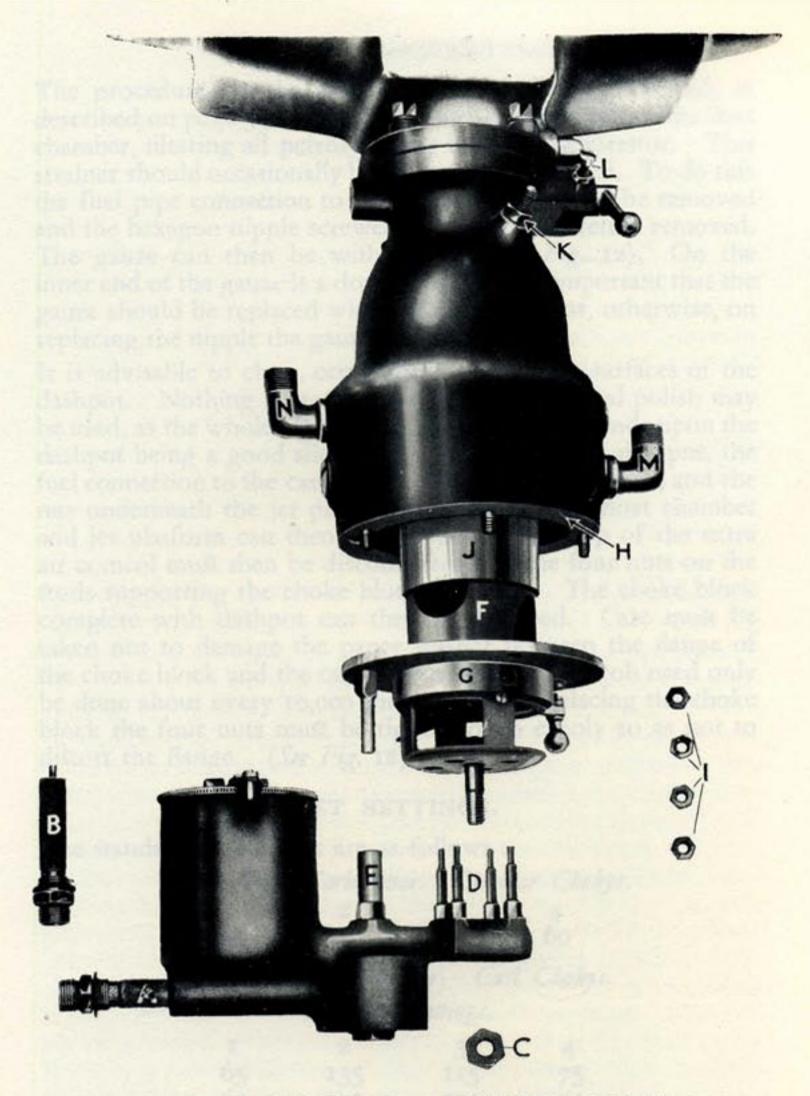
CARBURETTOR PARTLY DISMANTLED.
